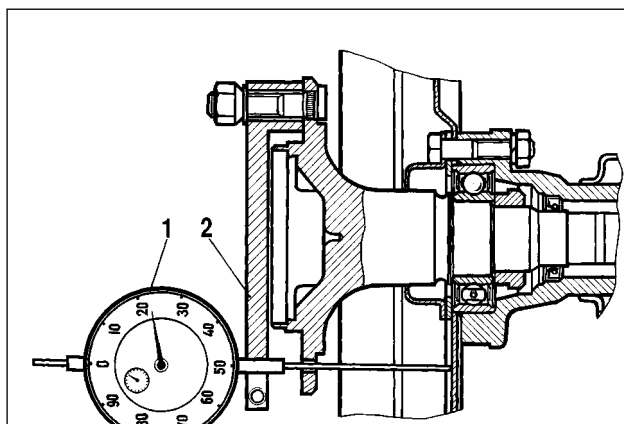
Checking the axle shaft axial play with the wheel and the brake drum removed:
